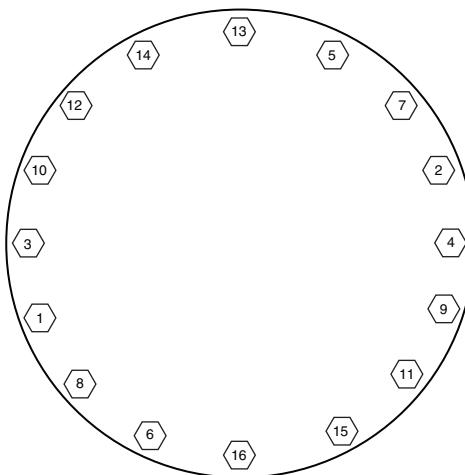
Cooler 225-300 and Condenser 150-200 Head Recommended Bolt Torque Sequence
